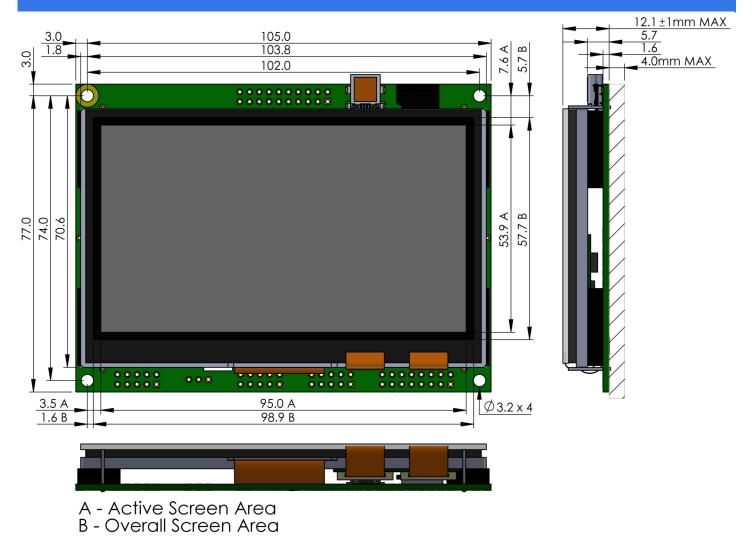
TU480x272C-K61XA1MU Mechanical drawing. Reference dimensions only.
